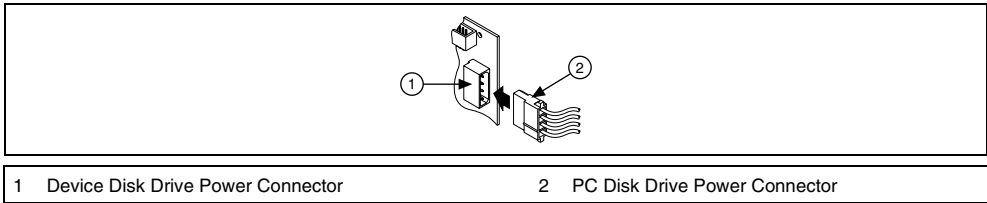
Attaching Disk Drive Power to the PCI Express Device
